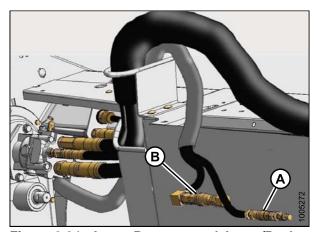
Auger Pressure and Auger/Reel Return Hose Couplers – 14-Ft. and 16-Ft. Header Shown (18-Ft. Similar)
